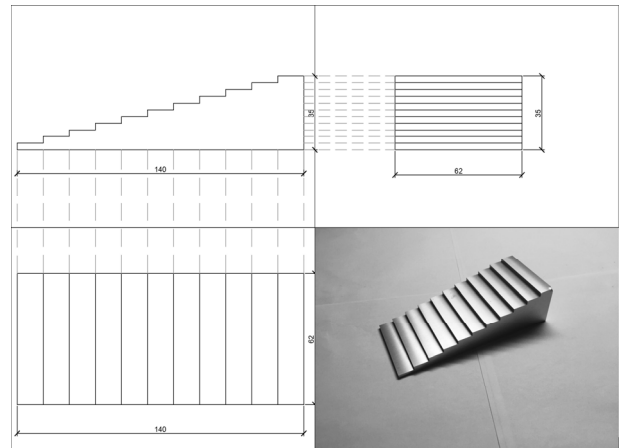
Aluminum Step Wedge model(140 mm × 62 mm × 35 mm)
